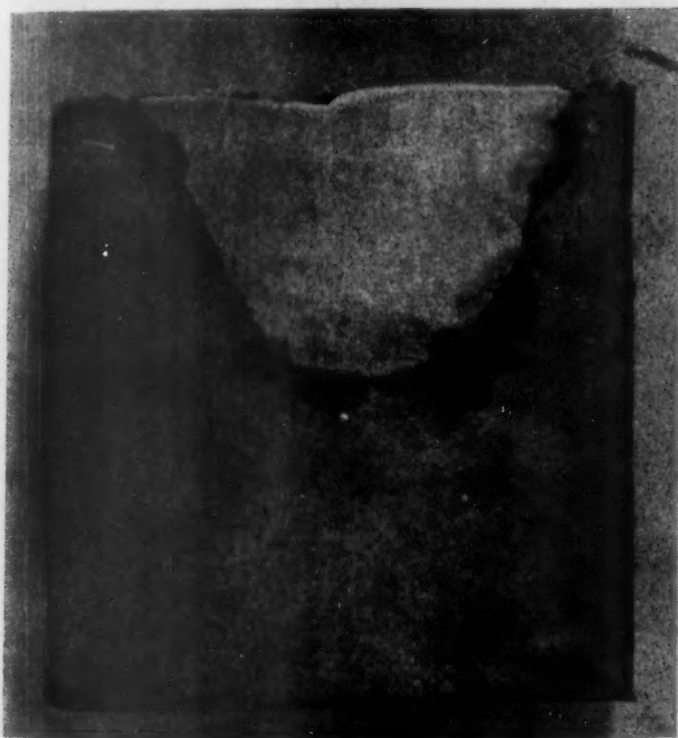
Macro Section of Weld Showing Typical Cracks in Heat-Affected Zone, Specimen No. 13. Ammonium Persulfate Etch, X1.5.
